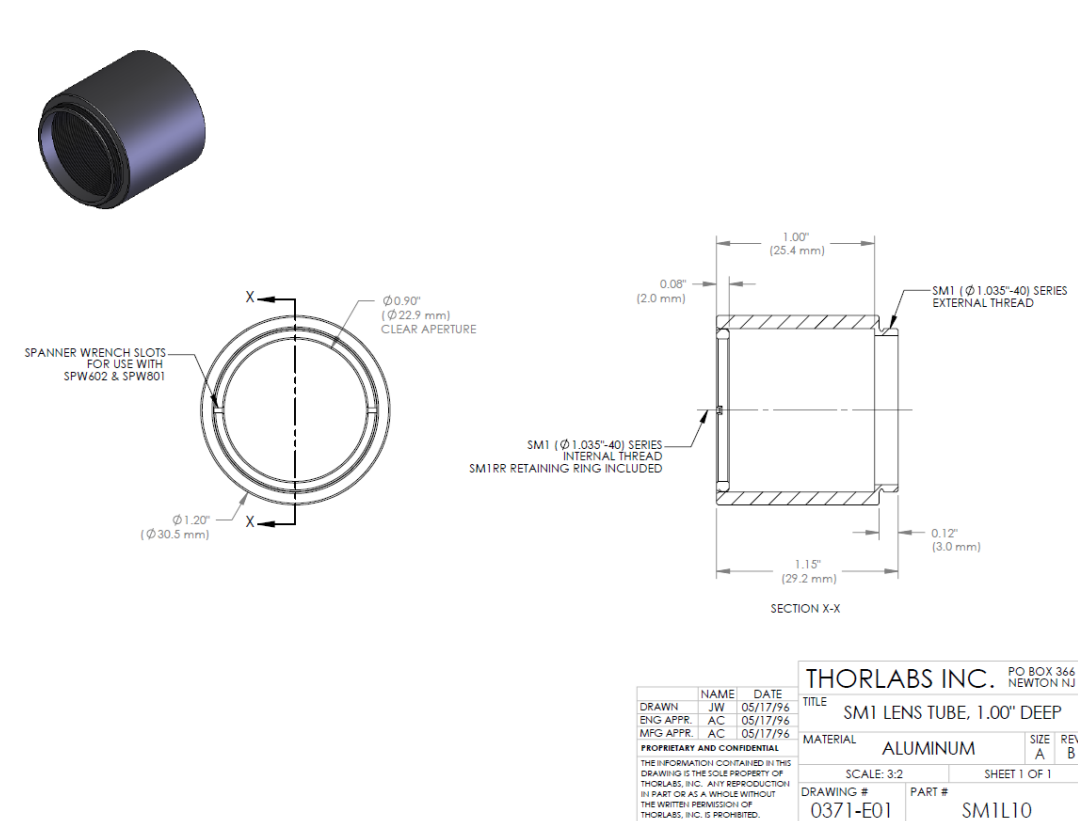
SM1 Lens Tubes, 1" Thread Depth
